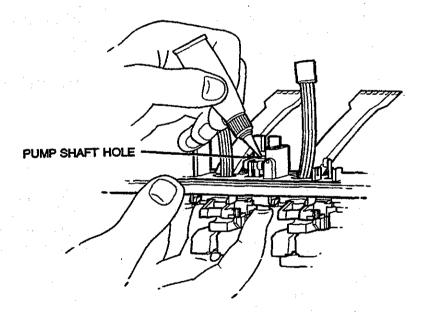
Pump Shaft Hole Lubrication (Diecast Chassis without Sleeve Bearing)
